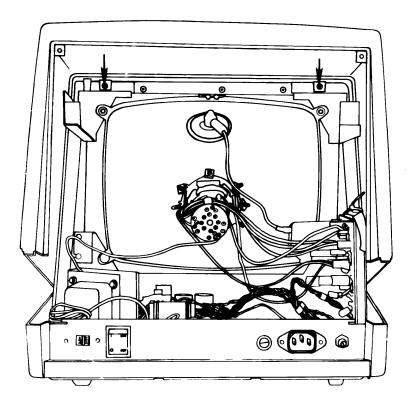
MDT 60 Cabinet Hood - Removing the Inside Screws
